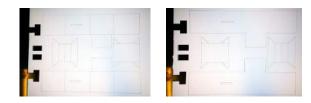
Fabricating a PARF mechanism is made easier through laser cutting by partially cutting through the foam board. A pattern is used with side A (left) and side B (right). The acrylic fixture is used to align the foam board for cutting on both sides (left).
